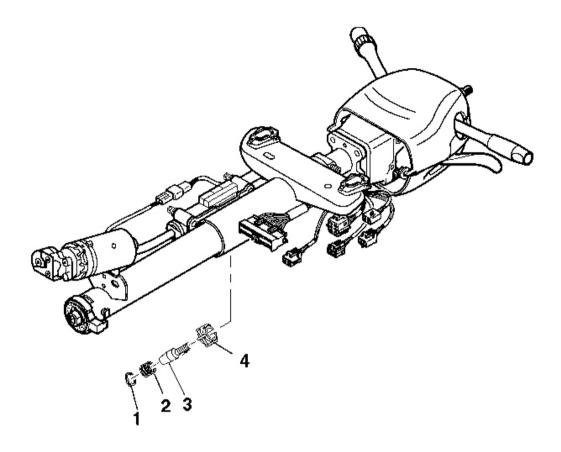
Housing Support Guide, Shoulder Bolt, Compression Spring & Retaining Ring Courtesy of GENERAL MOTORS CORP.
